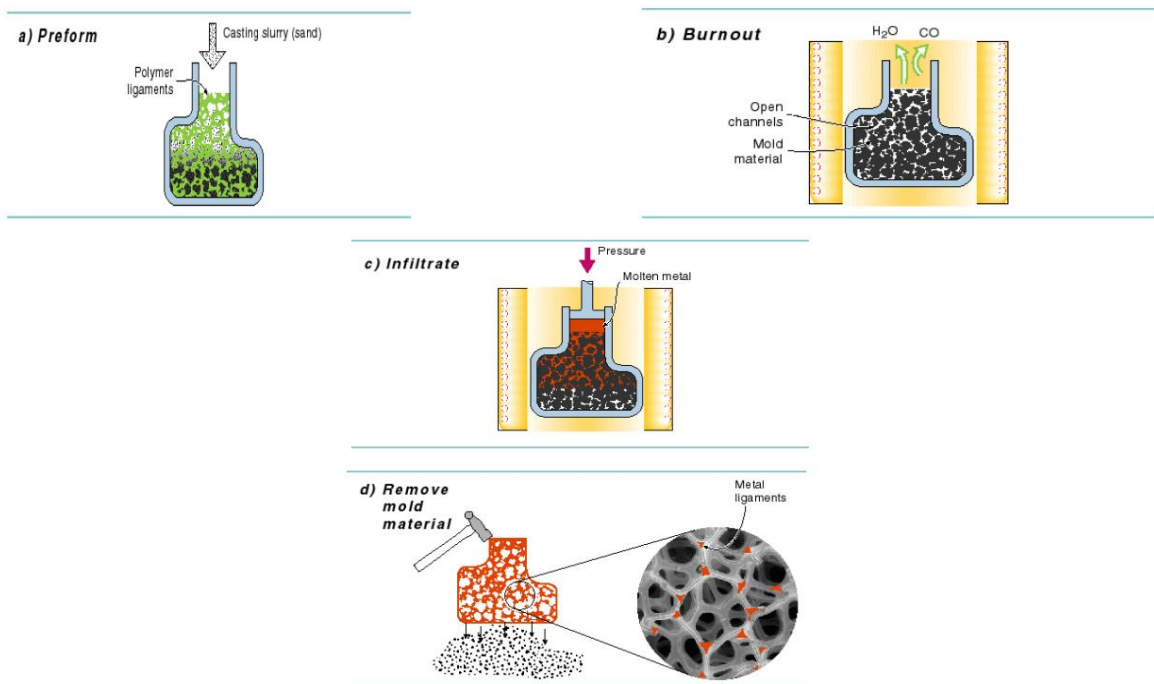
Investment casting method to manufacture open cell foams (DUOCEL process) [33].
